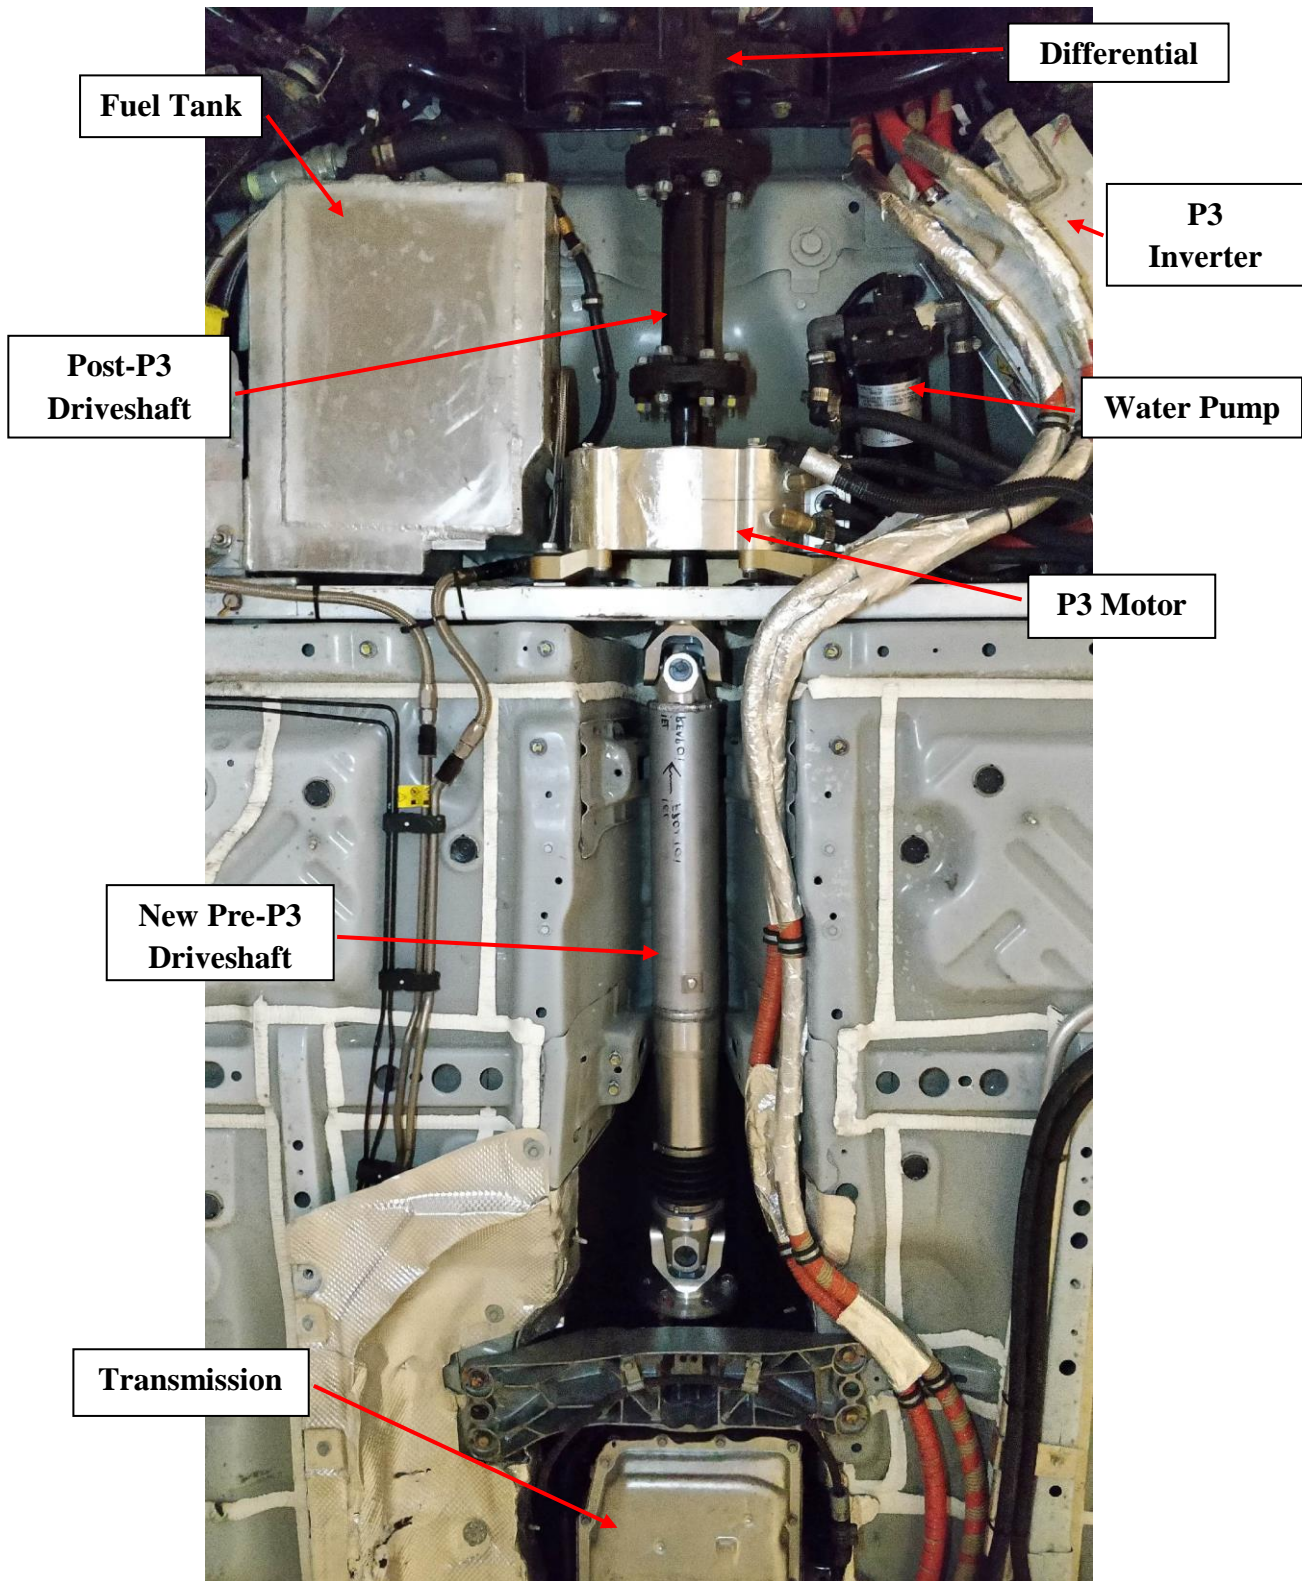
Bottom view of installed new pre-p3 driveshaft
